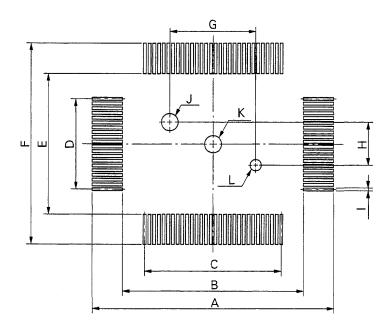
Socket Drawing of EV-9200GF-100 (Reference)
